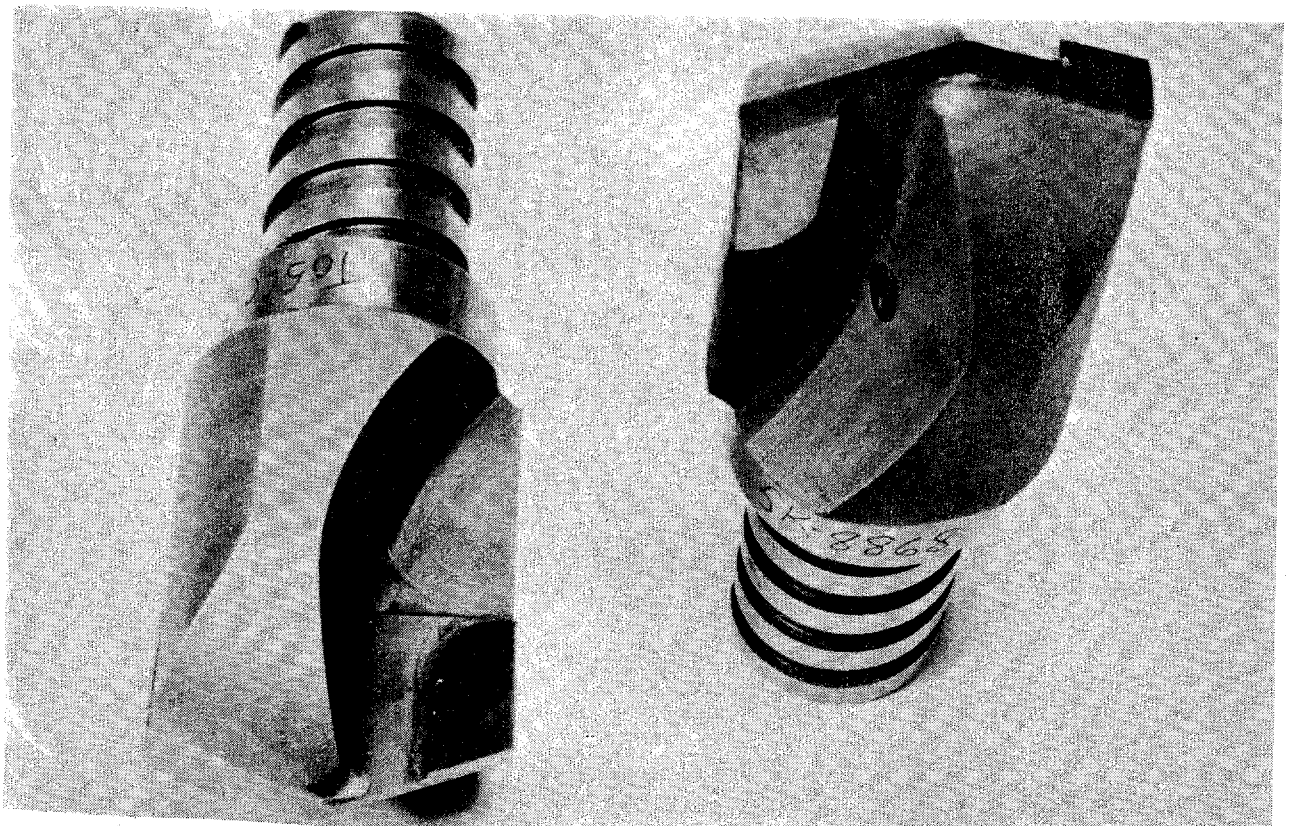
Rotary-drill test bit, designed by Tool Specialty Co., that employs two grades of tungsten carbide inserts.
